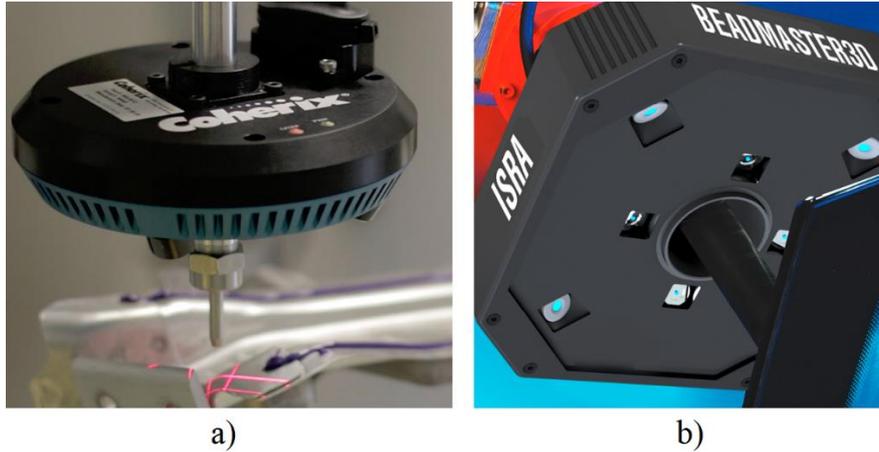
3D silicone bead inspection systems: a) Coherix Predator3D; b) ISRA Vision Beadmaster3D
